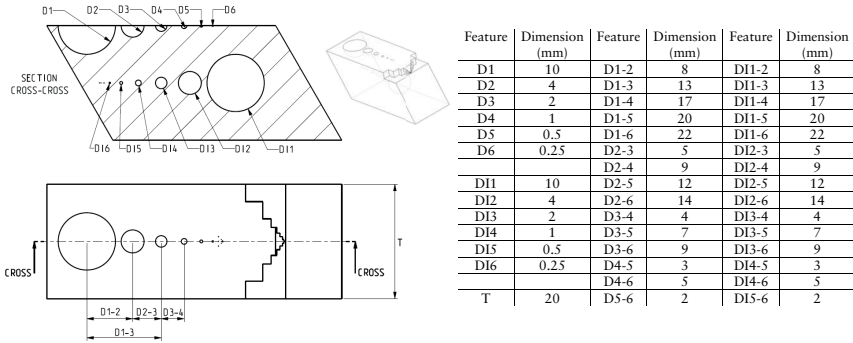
CAD design, dimensions and features of the sample geometry used in Paper I.
